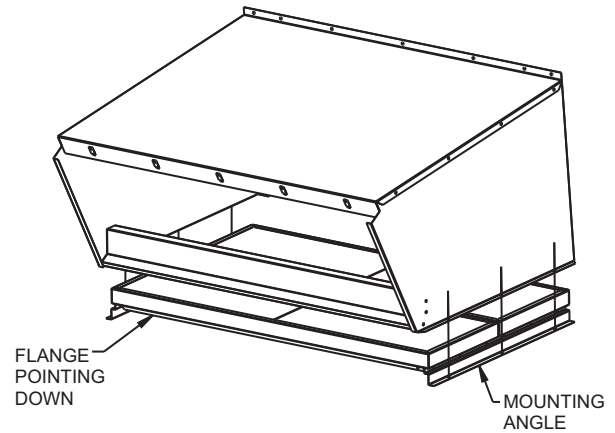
Bottom Filters Installed with Flange Pointing Down (Mounting Angle Location)
